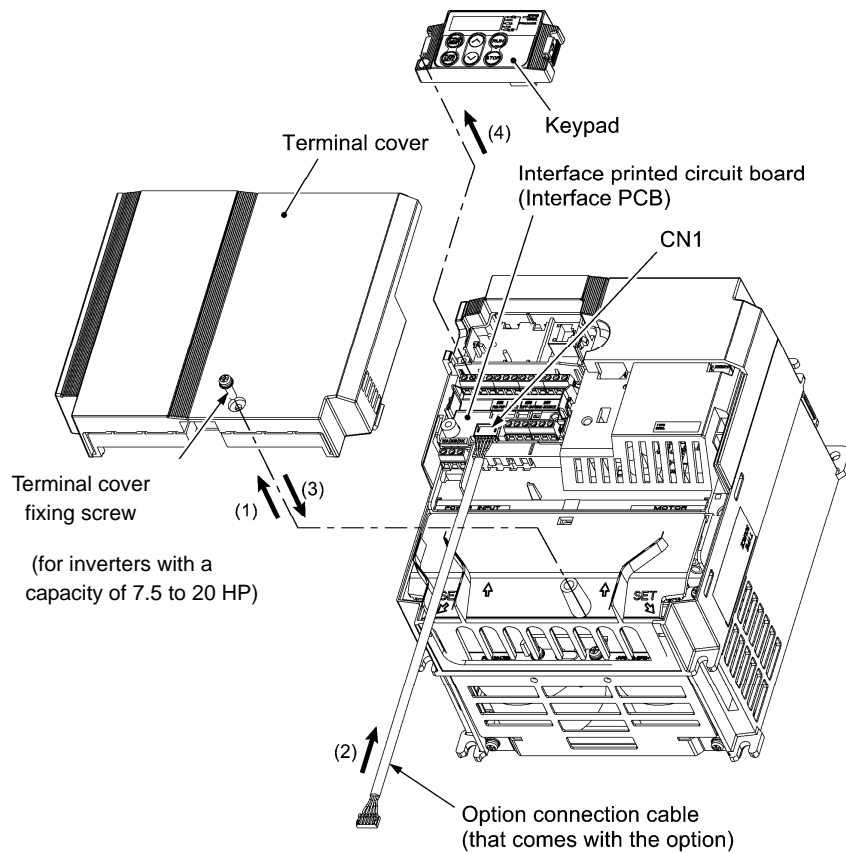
Connecting the Option Connection Cable to the Interface PCB and Removing the Keypad (For inverters with a capacity of 15 and 20 HP)
